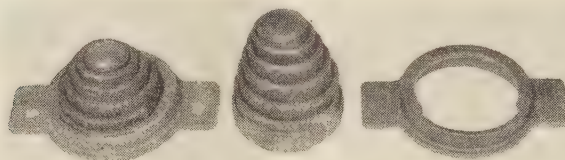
STATIC LOADING OF A BUMPER VOLUTE SPRING
